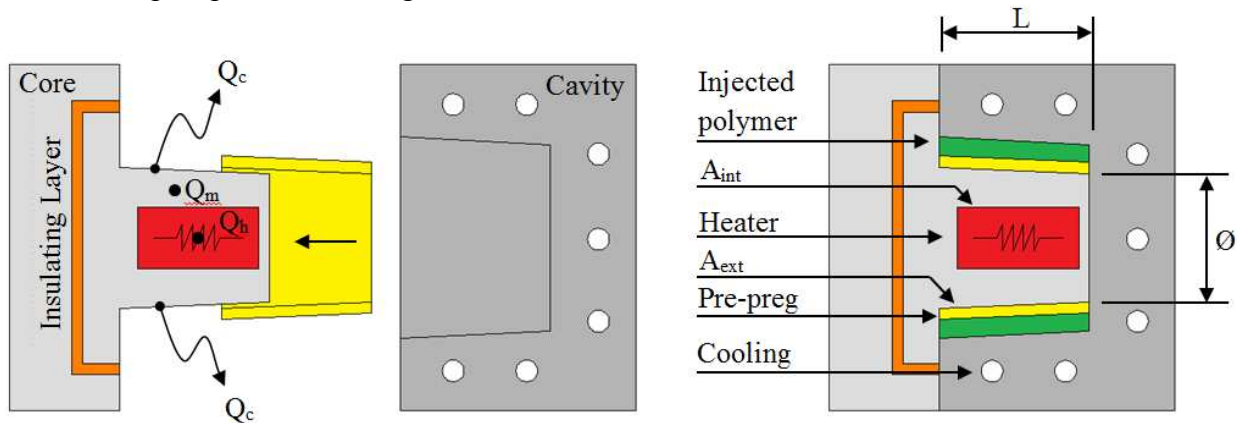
Concept of heating mould for overmoulding of composite parts.
